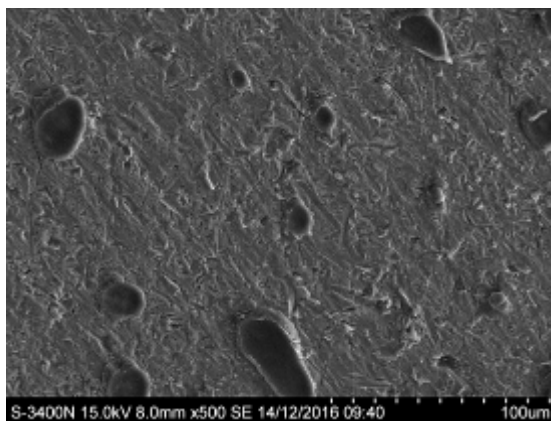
Fracture surface of Specimen A, most areas resemble that of Zone A of Specimen B, and are bare metal surfaces.
